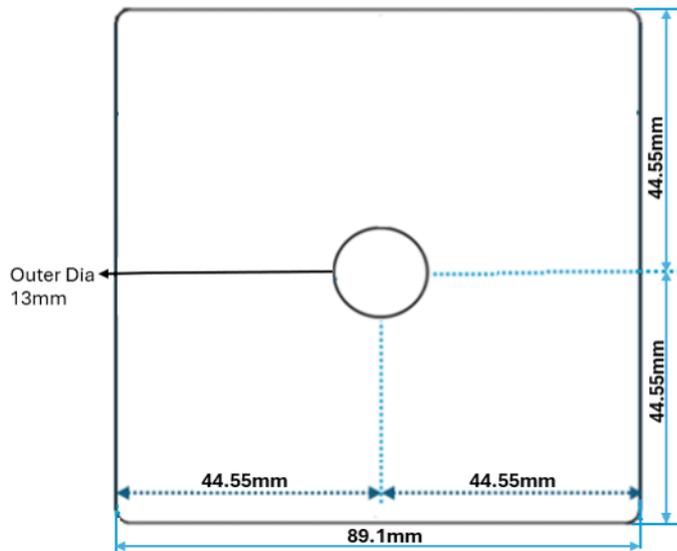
CTP40 Device (1-Button) Dimension – Front View
